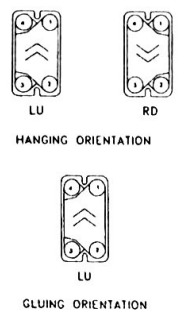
PLATE HANGING ASSEMBLY (PARALLEL FLOW)
